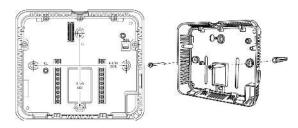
Mounting hole locations, dimensions, in. (mm) and securing the thermostat mounting base to the wall
